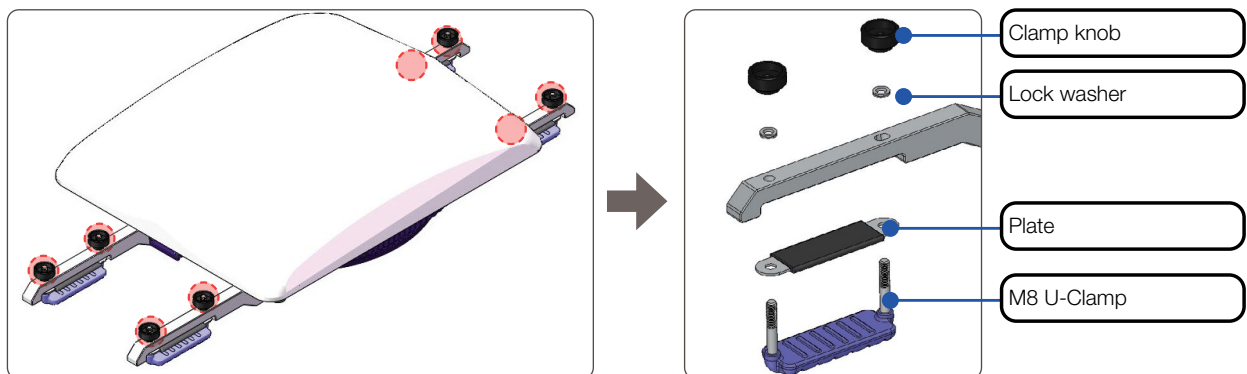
Loosening Clamp Knobs of the Land Mobile Mount Adapter
